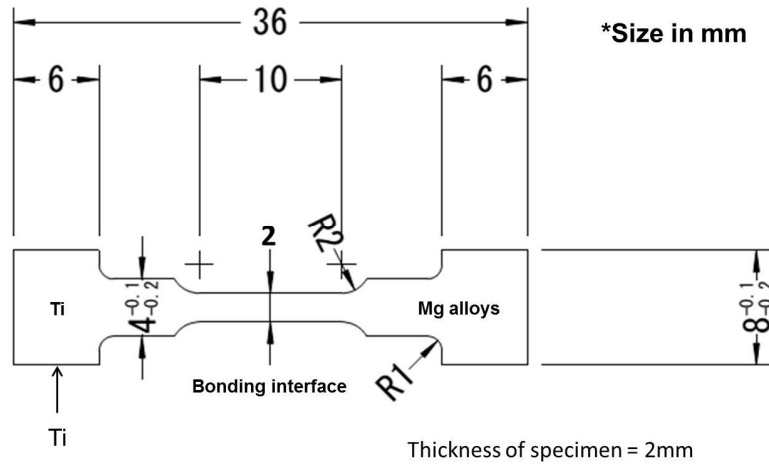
Schematic drawing of an in-situ tensile testing specimen.
